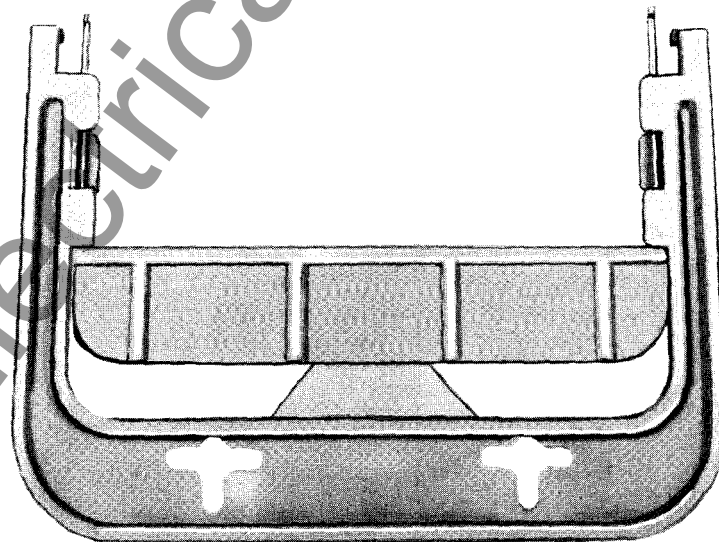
(8043016) Printed Circuit Card Extracting Tool
